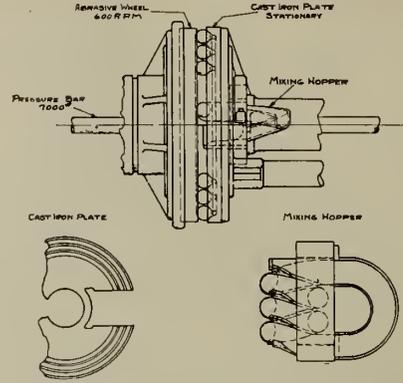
Diagrammatic View of Final Grinding Machine Head.
